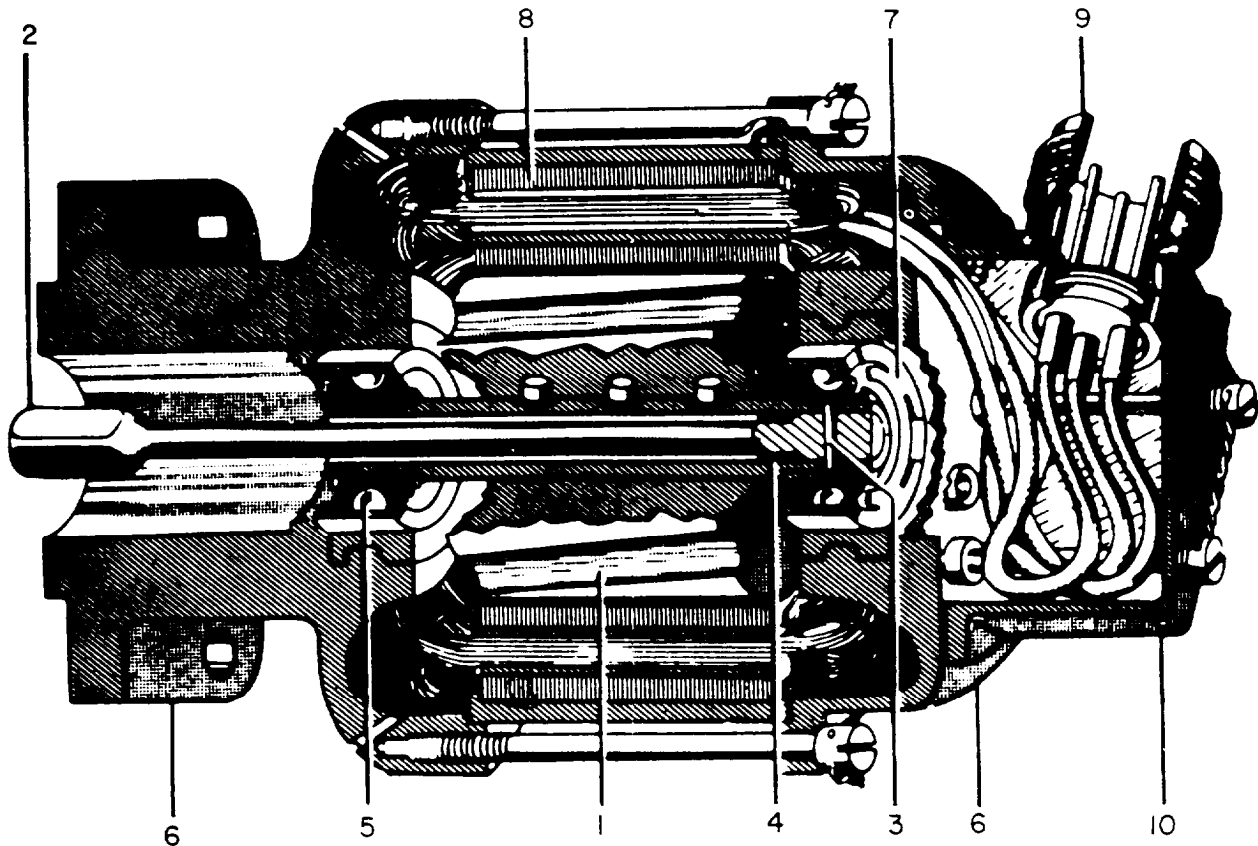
shows a cutaway view of a tachometer generator. You should refer to it while you read this section. The generator consists essentially of a permanent-magnet rotor (callout 1) and a stator (callout 8) that develop three-phase power as the rotor turns.
